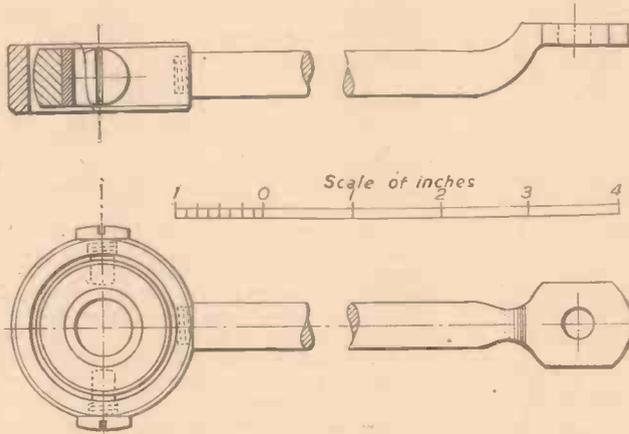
Part-sectional elevation and plan of the gimbal fitting.
